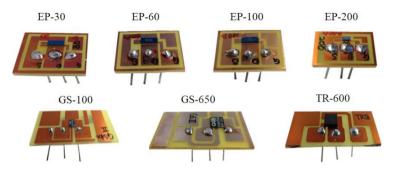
Seven kinds of test fixtures with power GaN devices.
